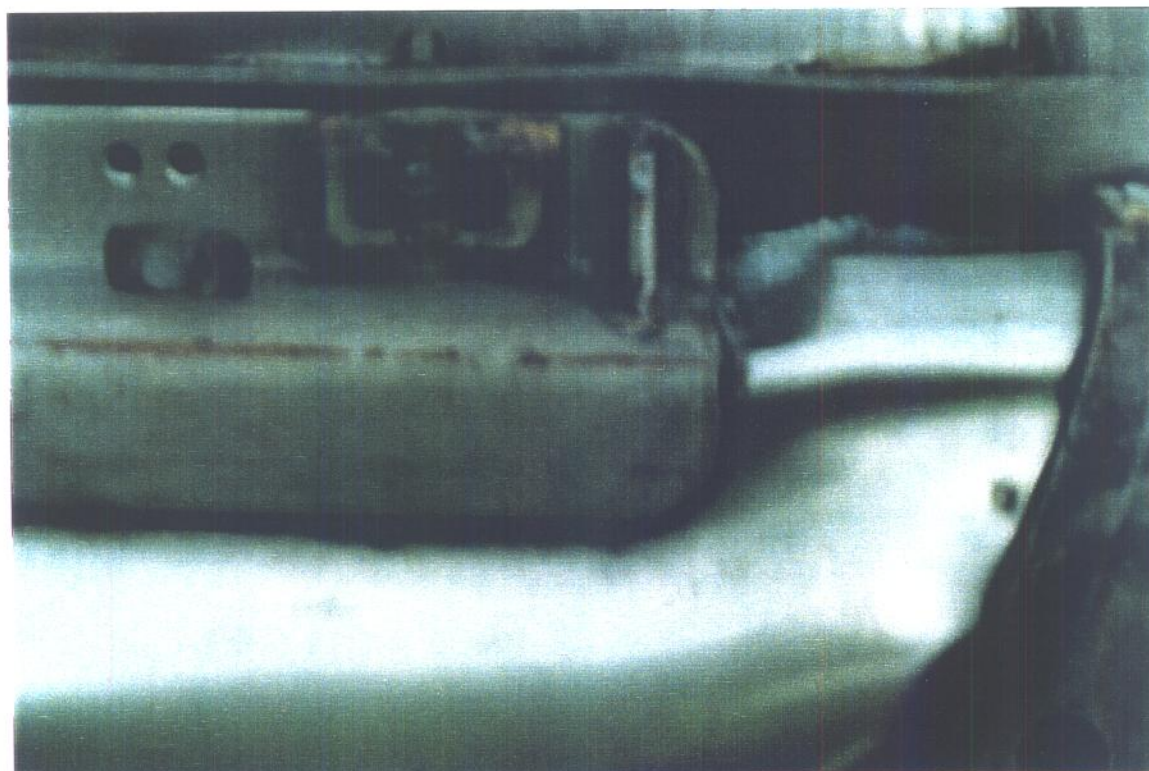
Close-up of Corner Bolt Following 1m Punch Test
